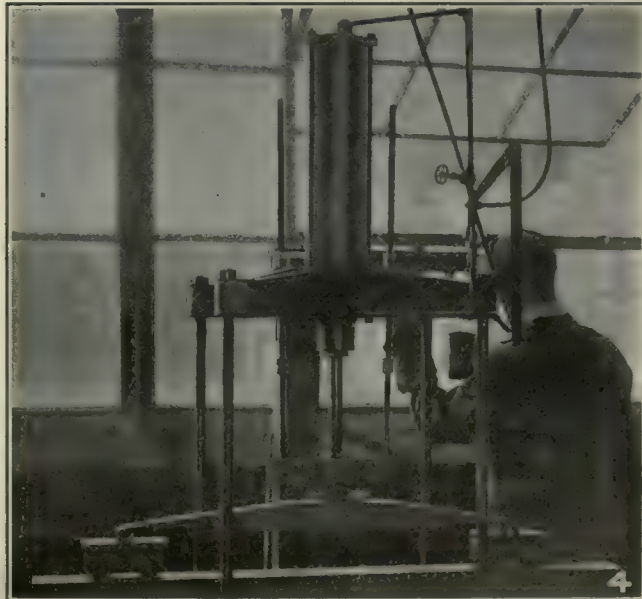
PRESS FOR TESTING CHASSIS SPRINGS
